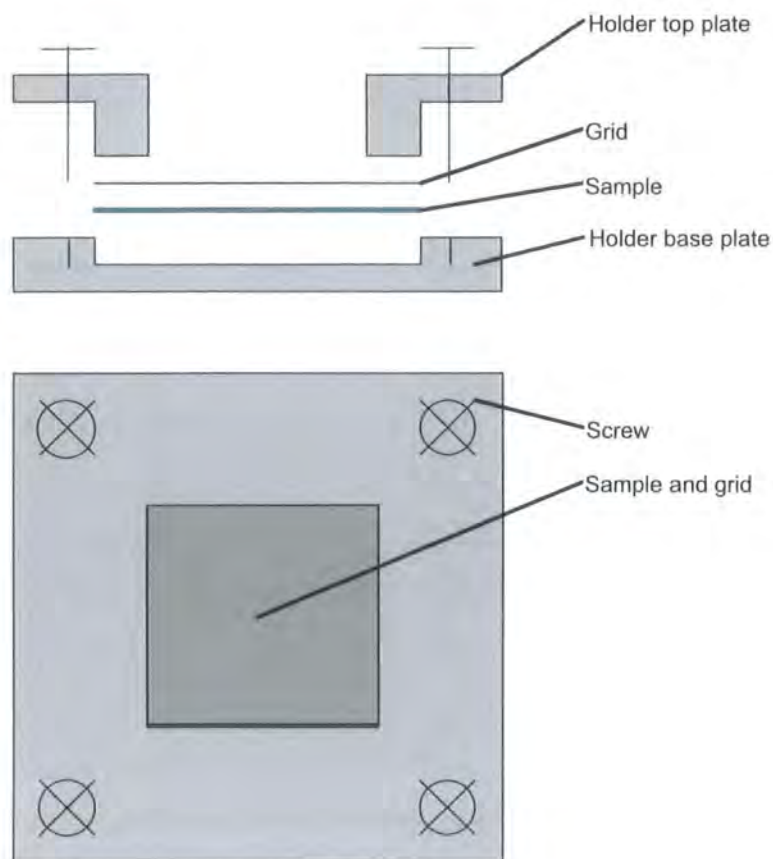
Side and top views of holder used to clamp the grid in position on top of the sample
